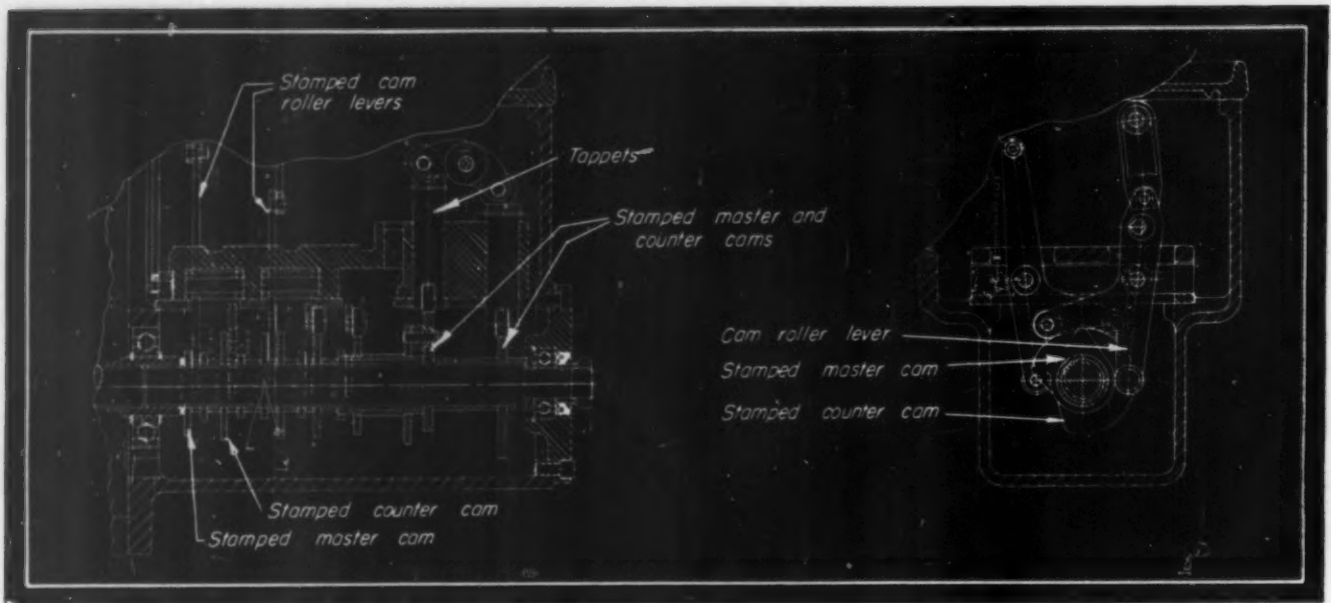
Production design of receiving box uses stamped master and counter plate cams, giving a positive drive. Cam roller levers are also stamped. Noteworthy is the use of tappets to give oscillating motion to shaft at 90 degrees to drives obviating barrel cam
